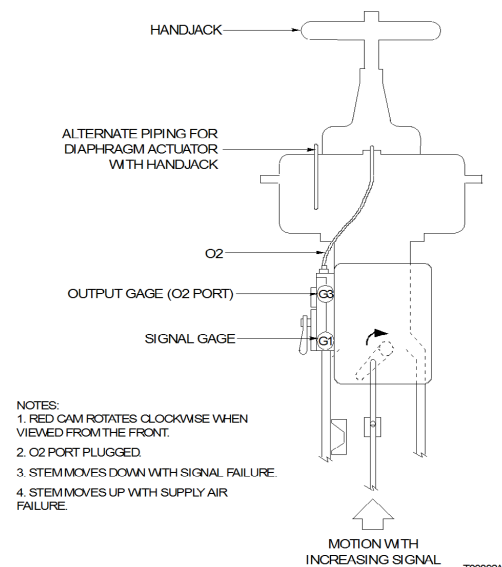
Reverse Acting, Top Loaded, Single Acting Tubing Example
